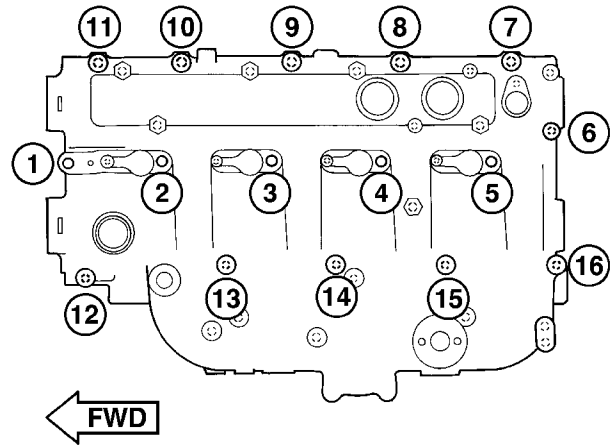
CYLINDER HEAD COVER/INTAKE MANIFOLD TIGHTENING SEQUENCE
